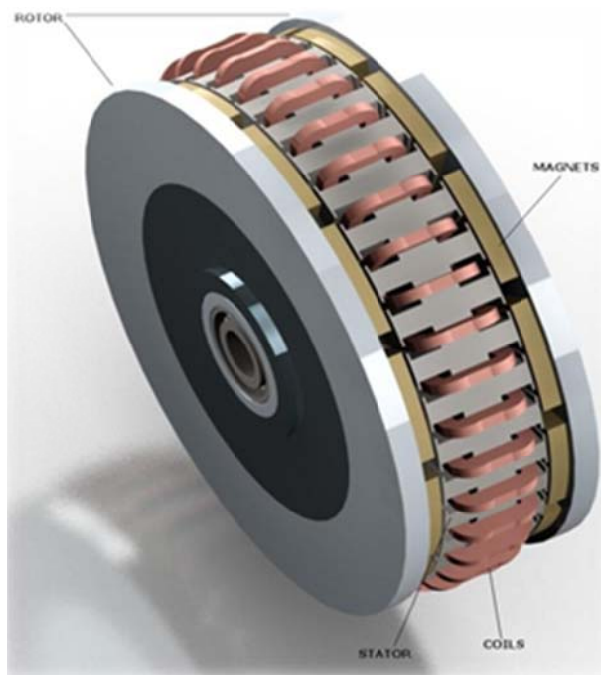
Axial Flux Permanent Magnet Machine (AFPMM)
